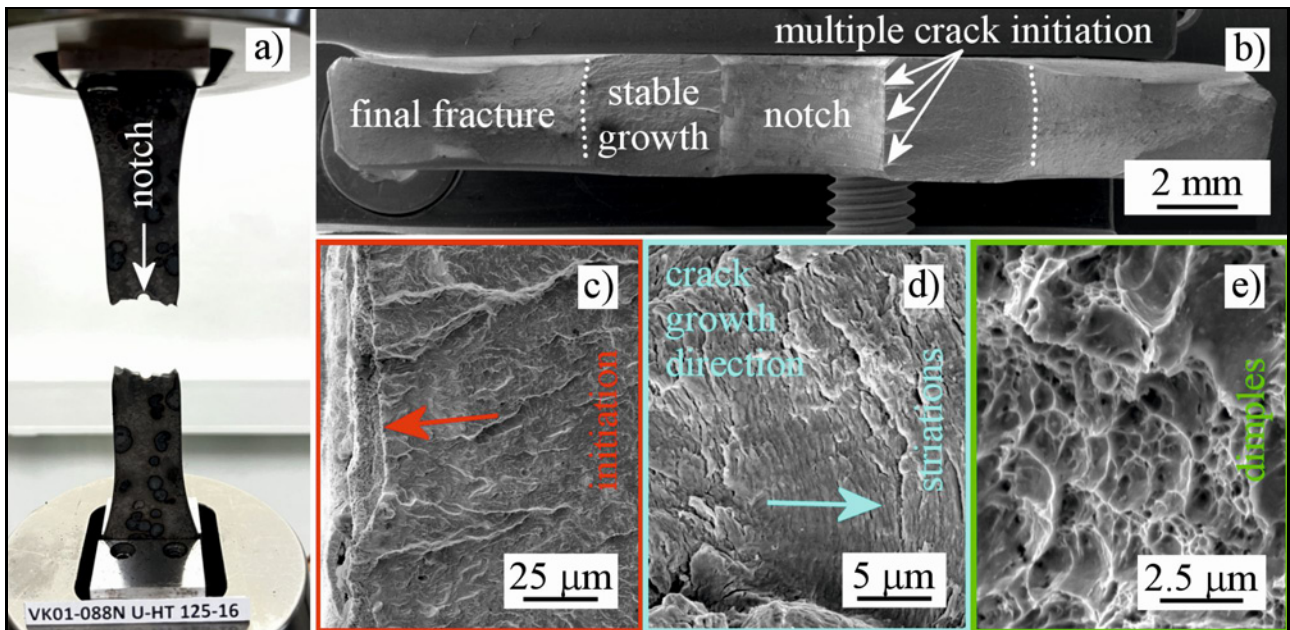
Fractography of HT125 specimen 16 ($N_f = 11,000$, $\sigma_a = 550$ MPa): (a) specimen after test termination gripped in loading machine, (b) overview of the fracture surface, (c) detail of one initiation point, (d) detail of striations, arrow indicates crack growth direction, and (e) ductile dimple pattern from final fracture area.
